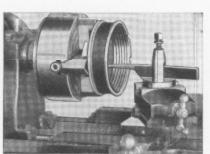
Chasing the Threads on a Hub Cap Held in a Chuck in the Lathe
